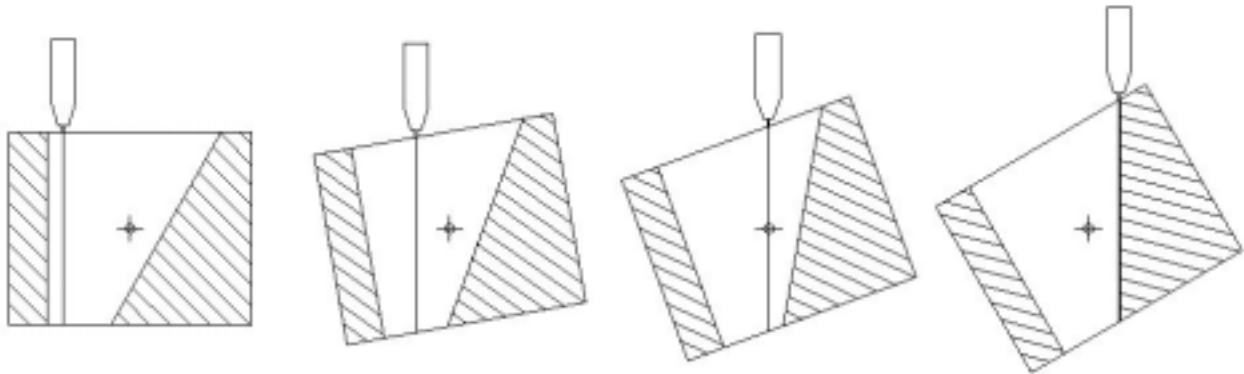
A complex part machined indexing the b-axis between two consecutive cutting cycles.
